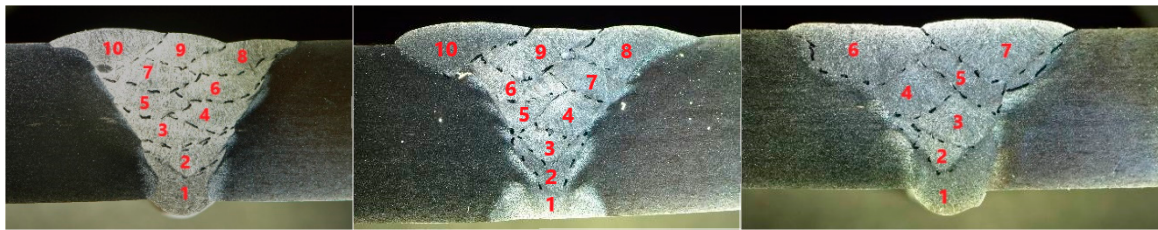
Welding sequence layout. (Left) FR weld; (Center) GR weld; (Right) GH weld.
